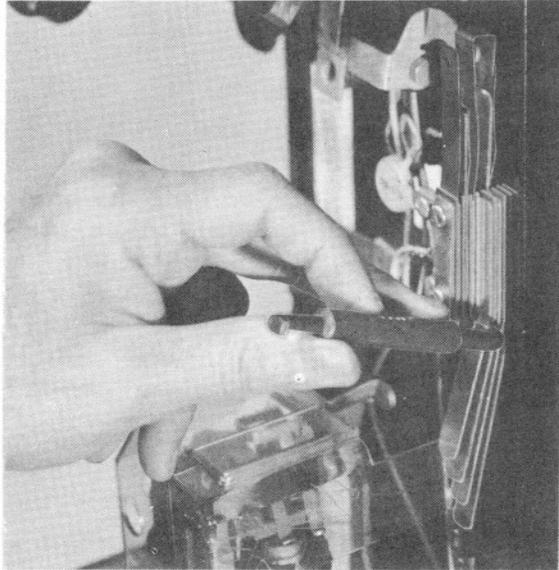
ADJUSTMENT OF HOUSING CONTACT SPRINGS
